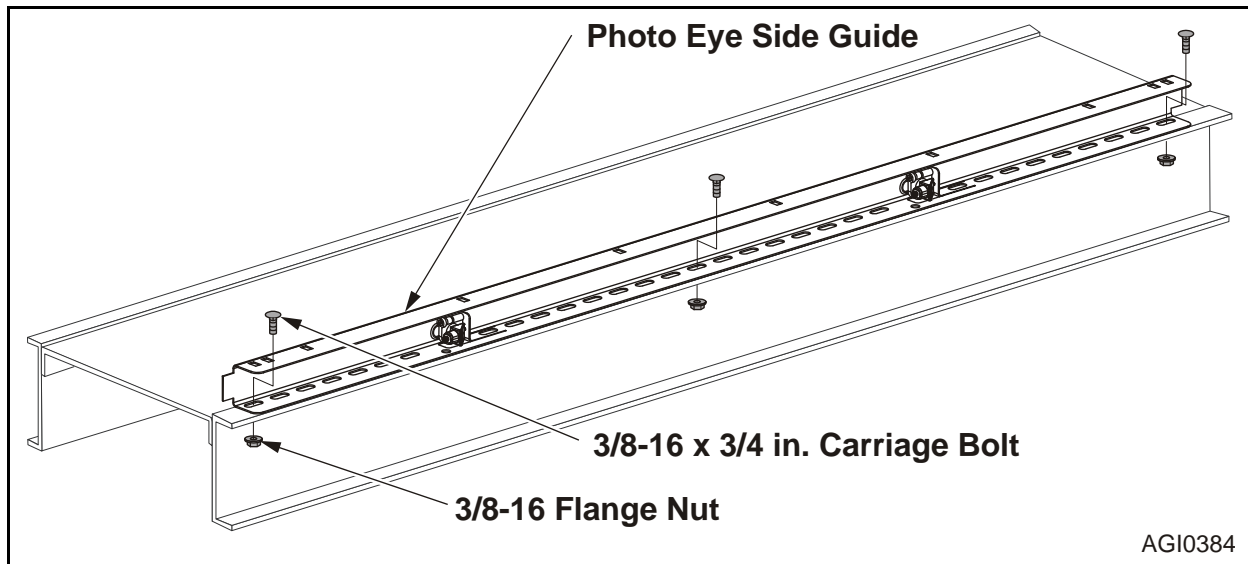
72 Direct-Mounting the Photo-Eye Side Guides
